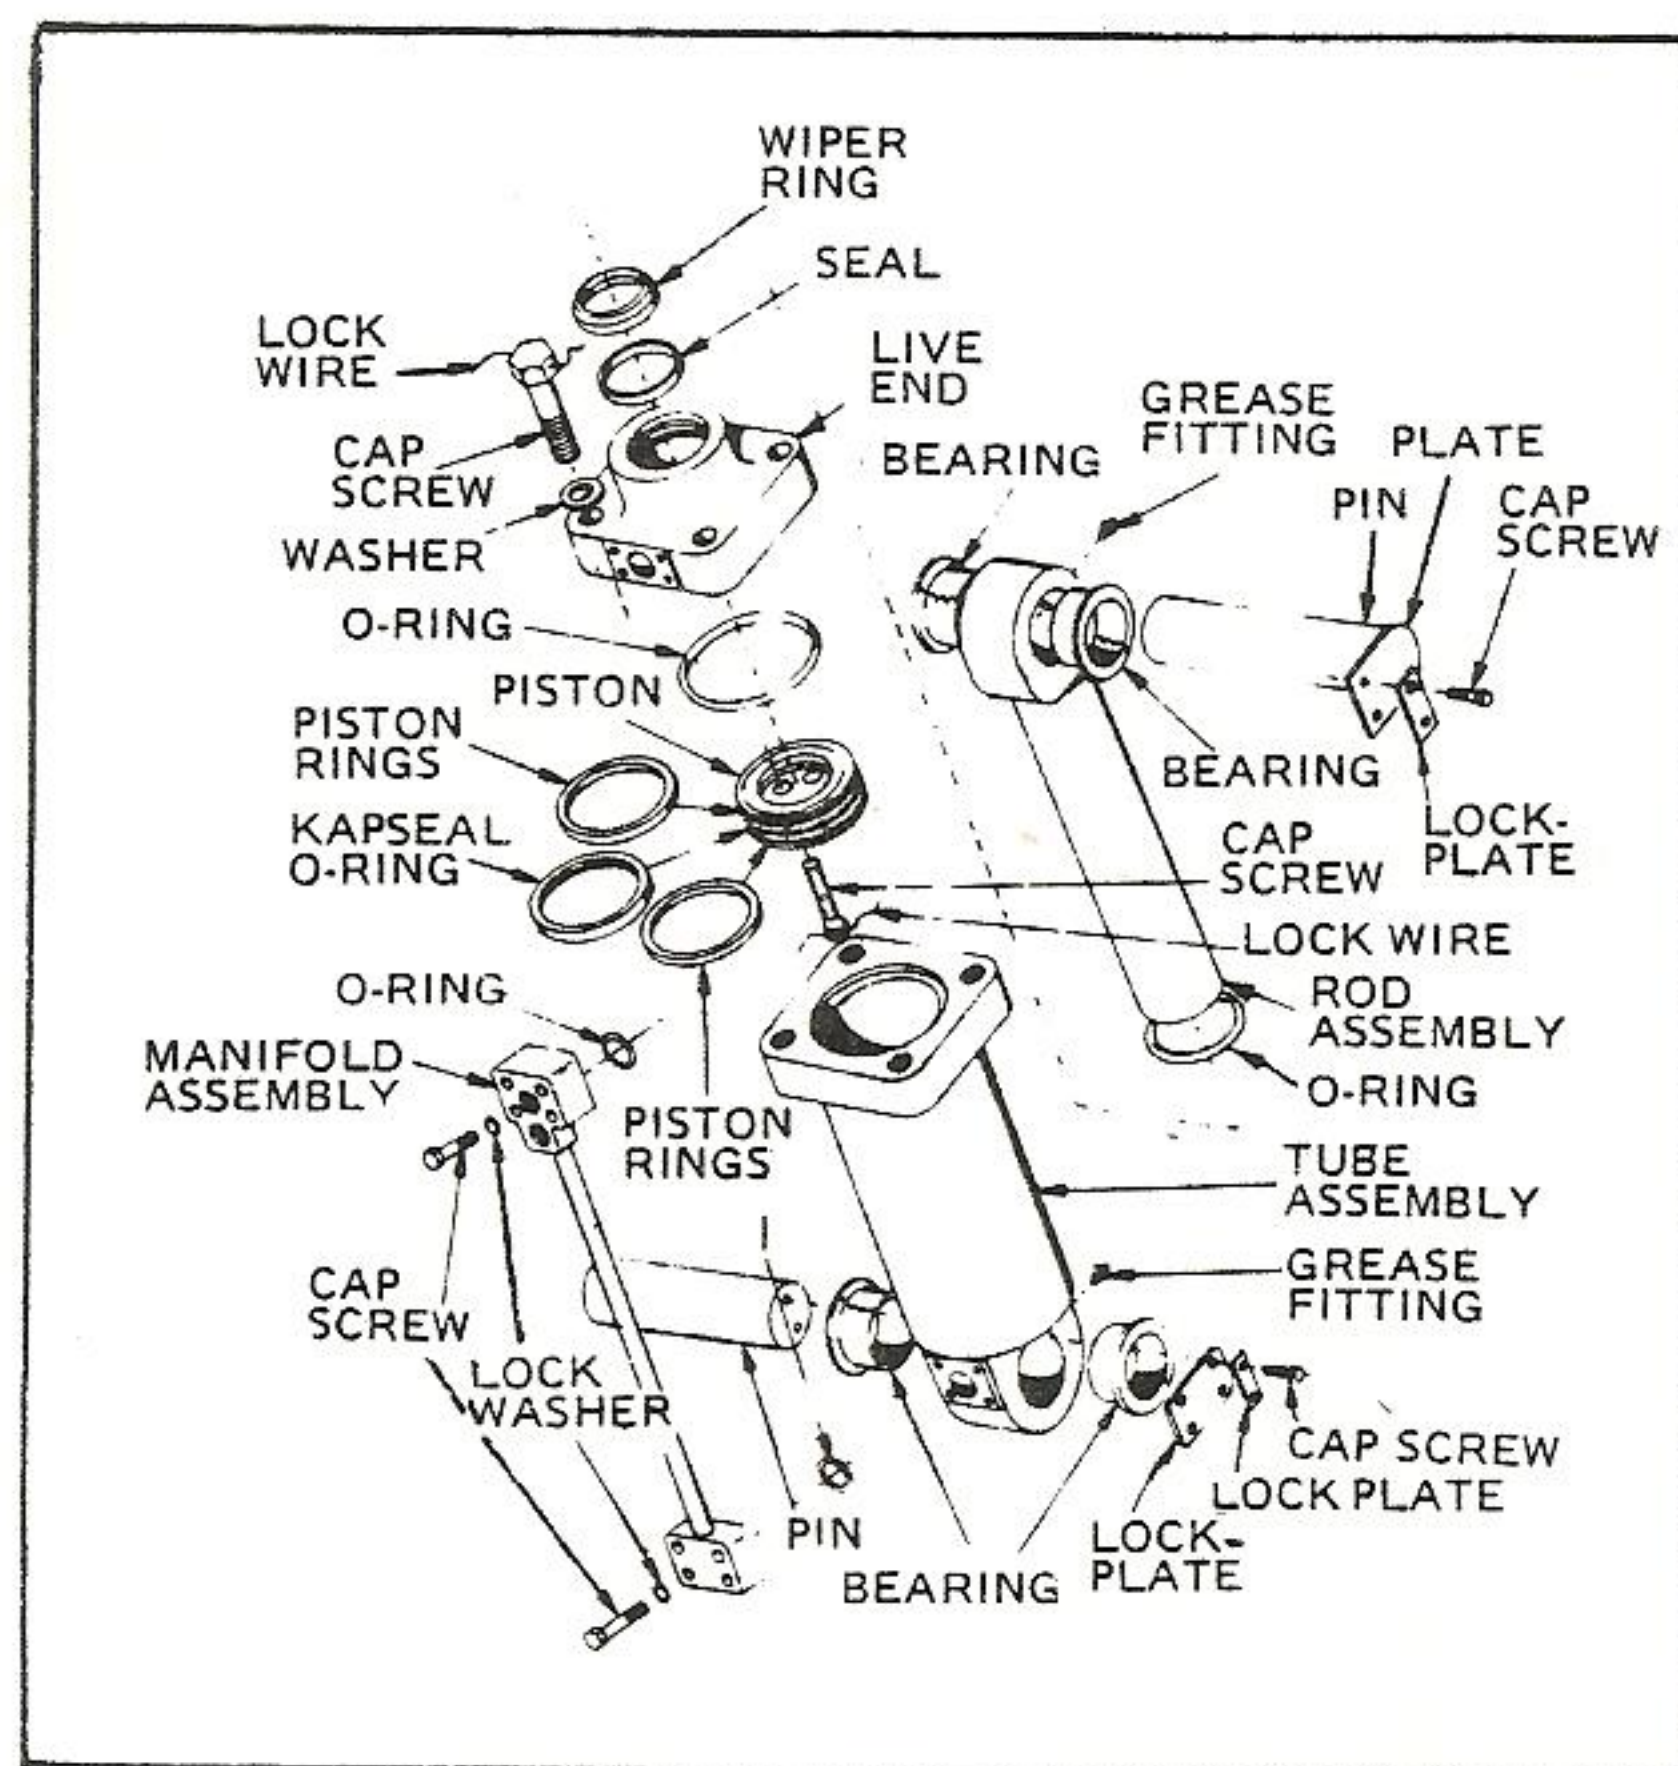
25. LIFT CYLINDER DIS-ASSEMBLY
